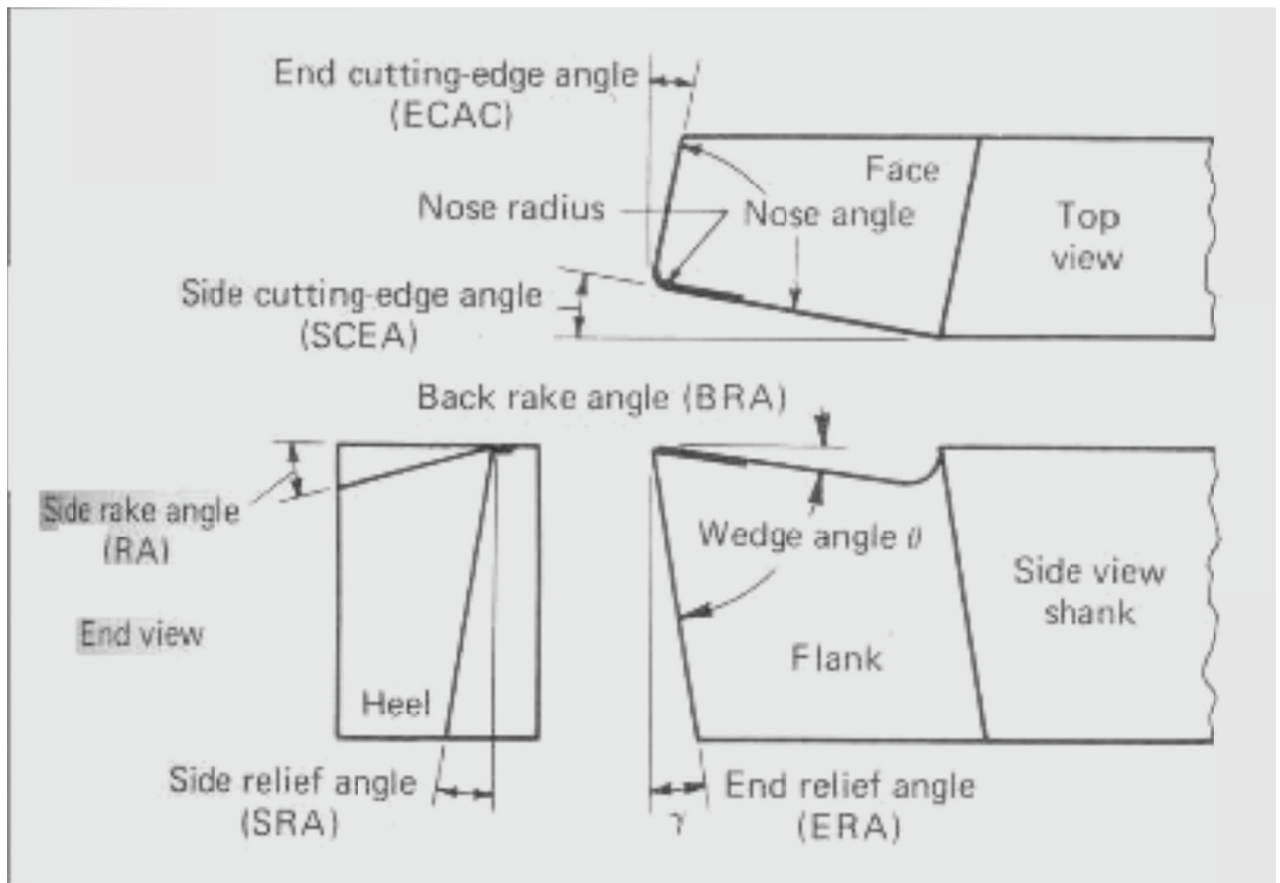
Geometry of a Single Point Turning Tool ^[66]
